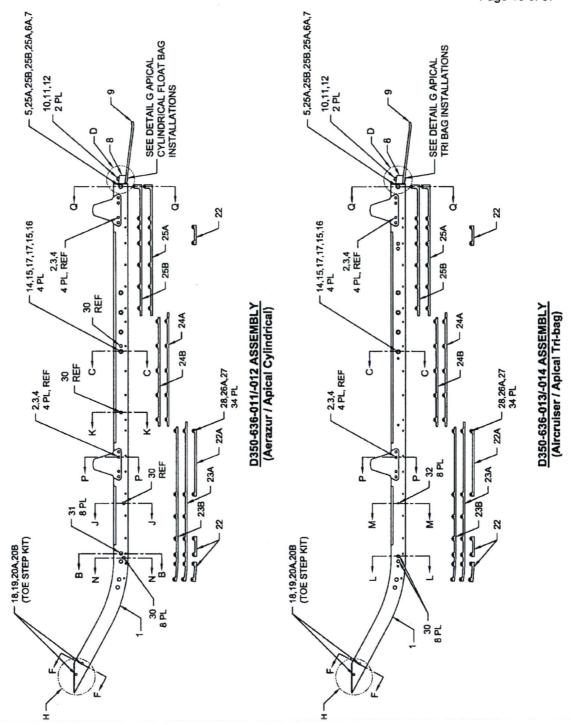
D350-636-011/-012/-013/-014 SKIDTUBE ASSEMBLY
